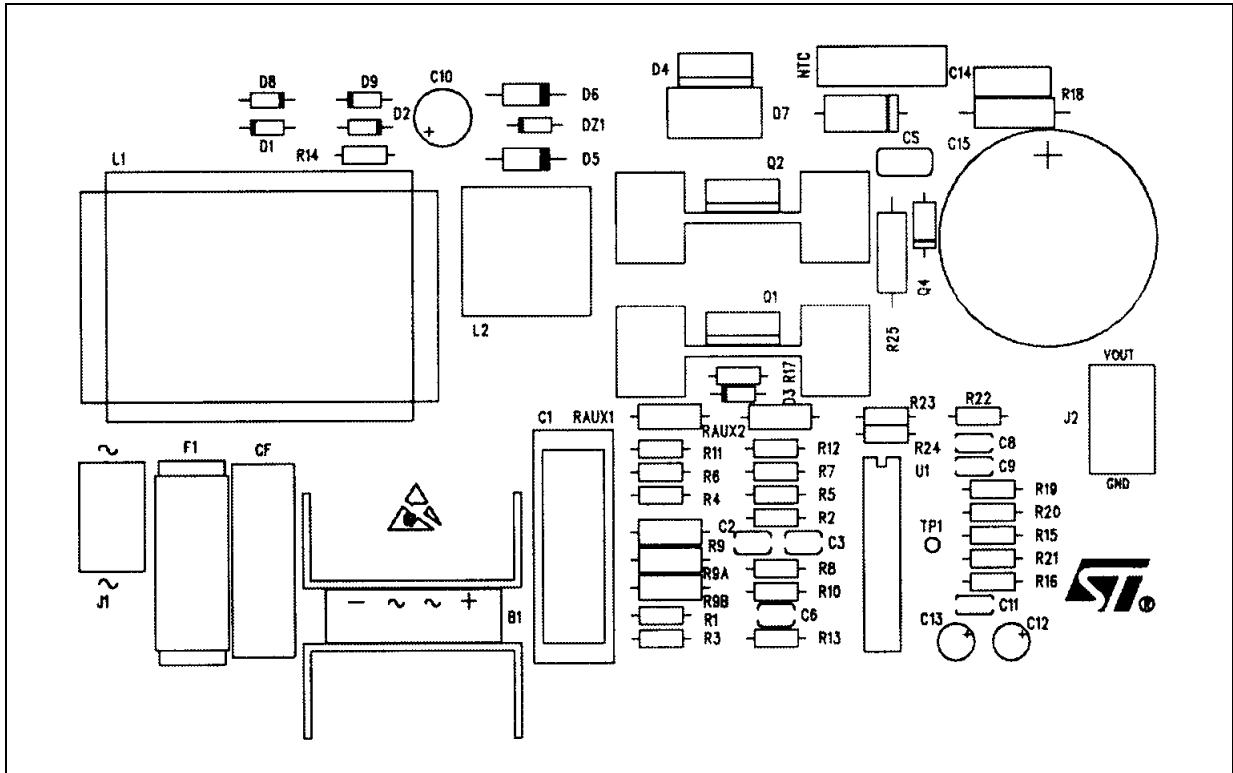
P.C.B. Component Side (Dimensions 88 x 150mm)
